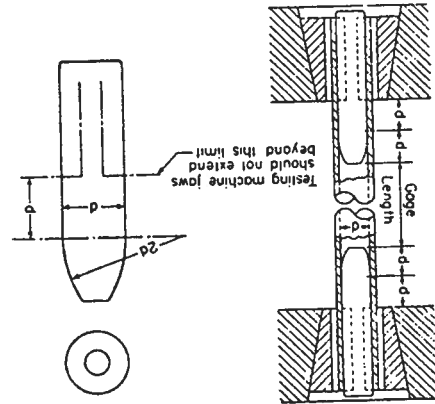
Metal Plugs for Testing Tubular Specimens, Proper Location of Plugs in Specimen and of Specimen in Heads of Testing Machine
